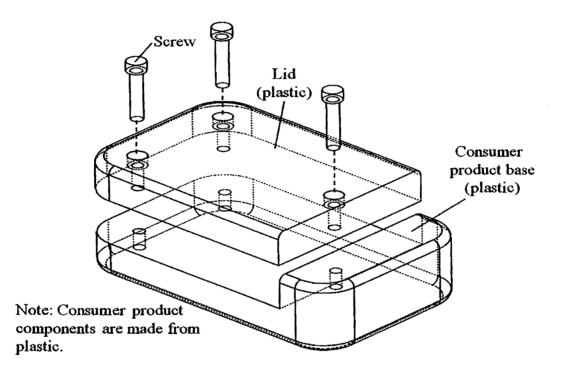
Exploded assembly drawing of the electronic consumer product.
